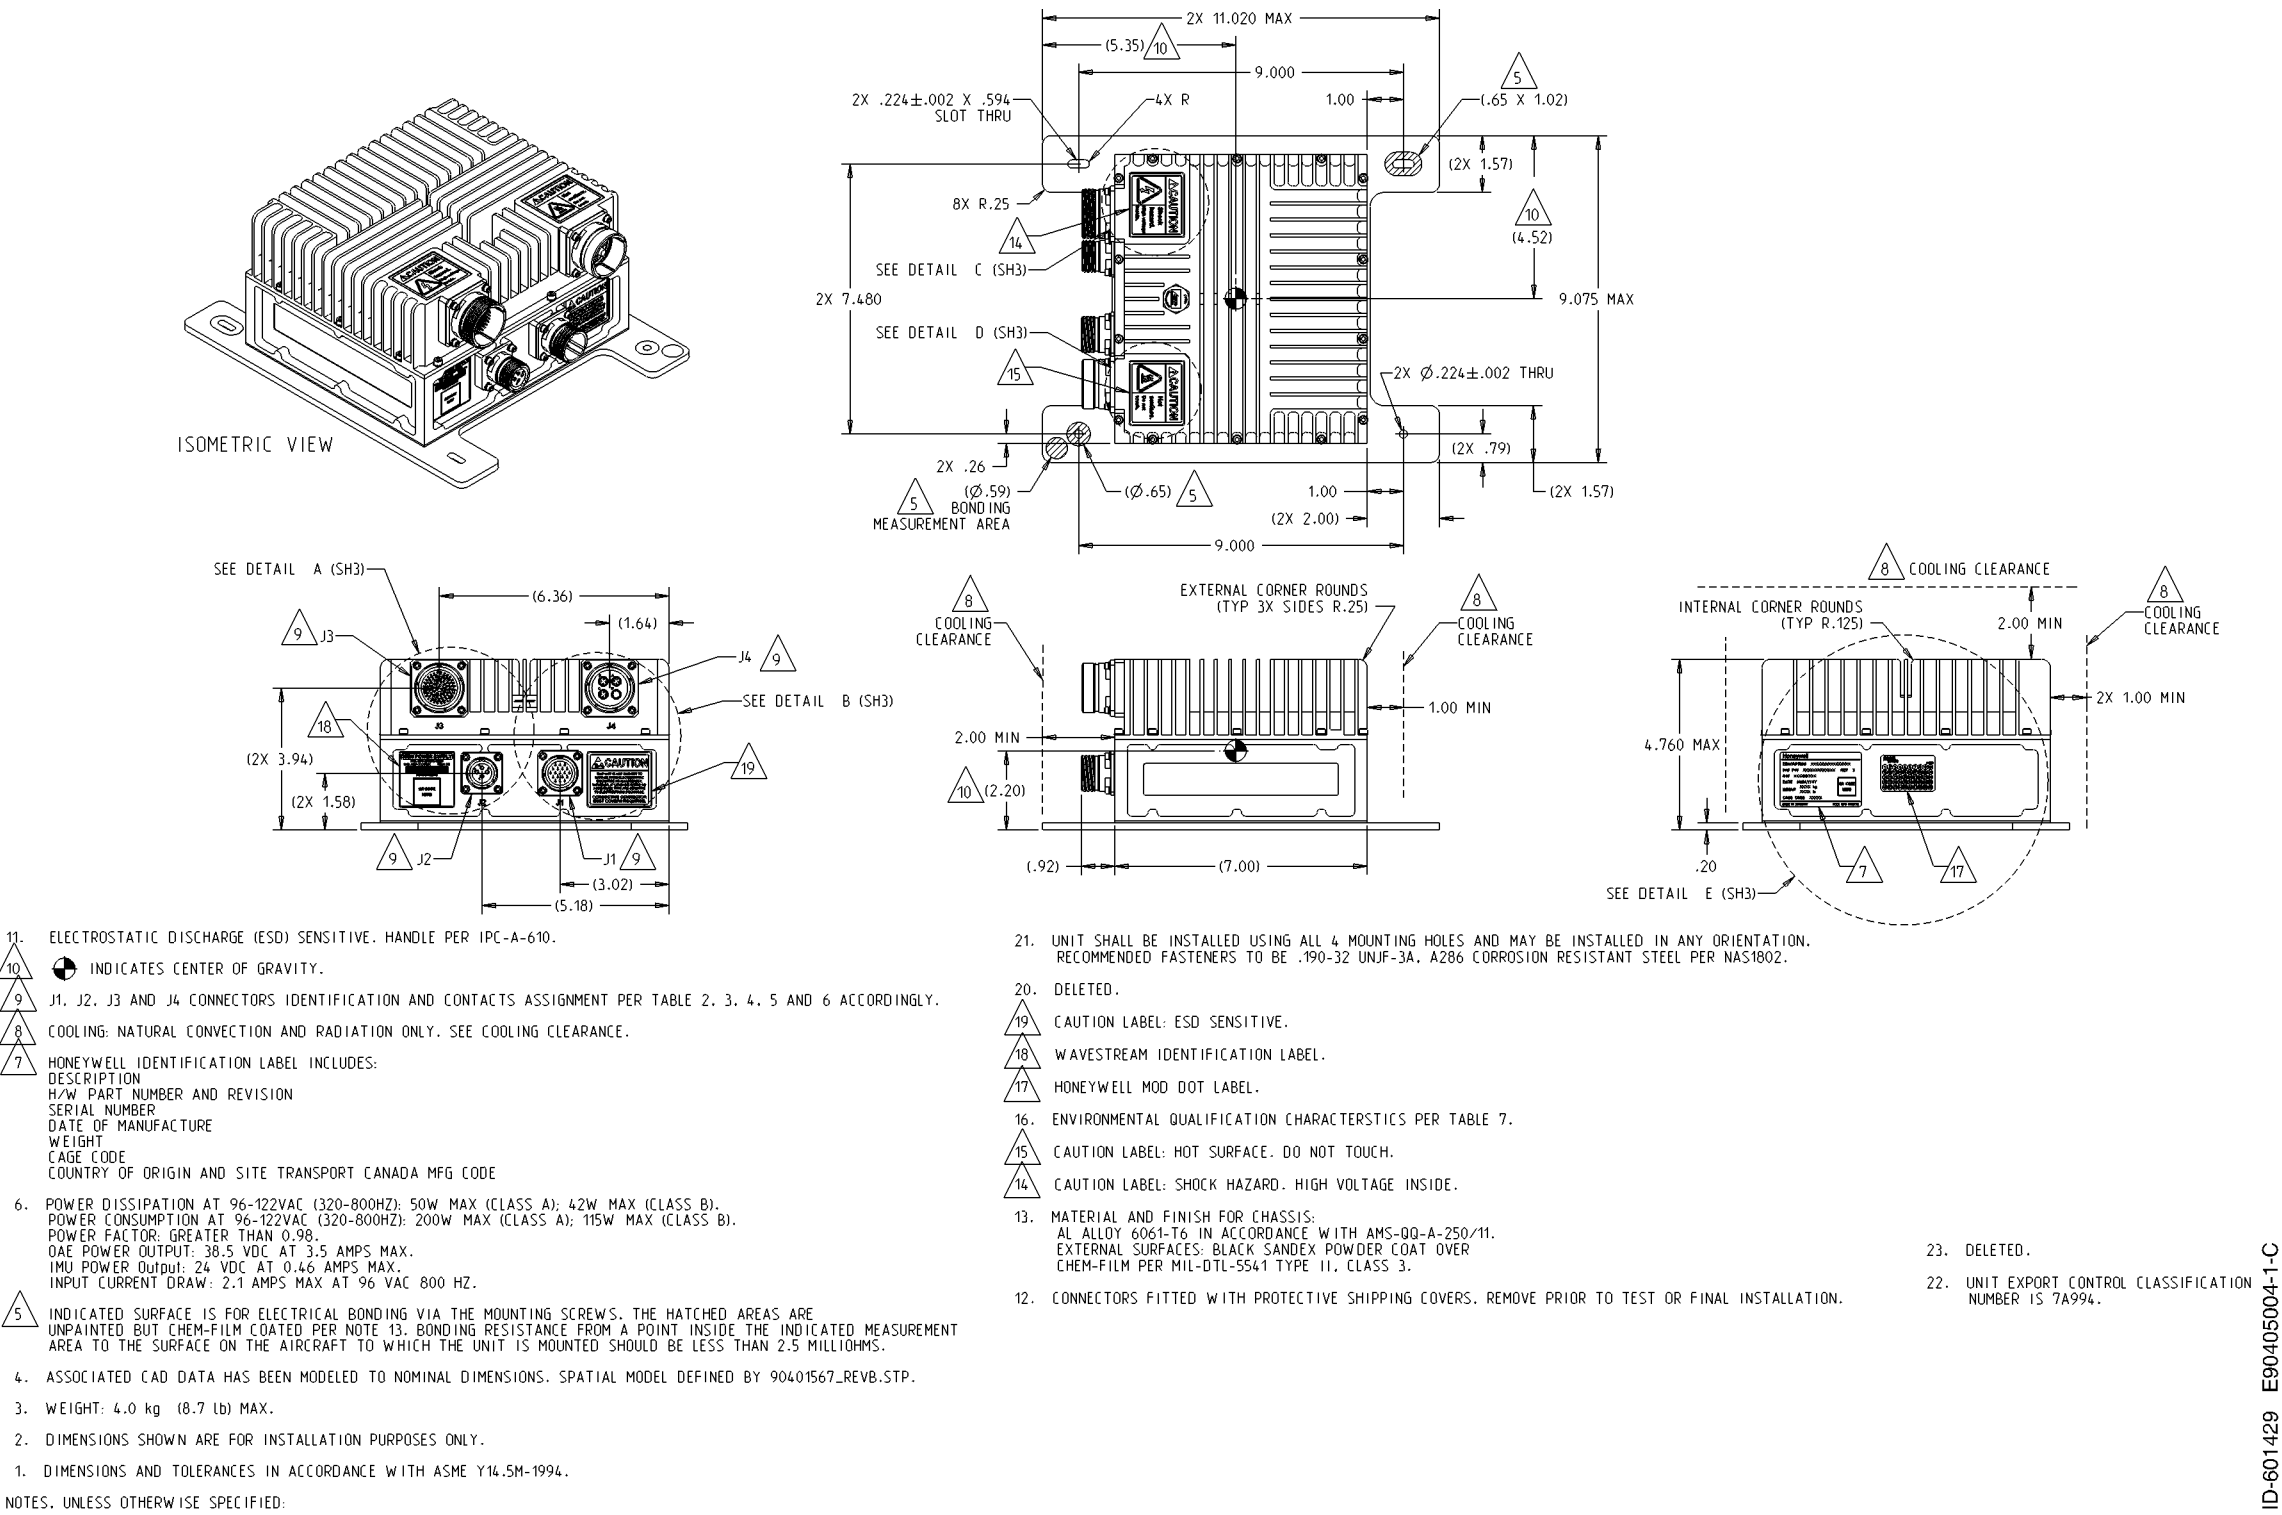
(Sheet 1 of 3) KANDU Variant 2 Outline and Installation Drawing (90405004, REV C)
